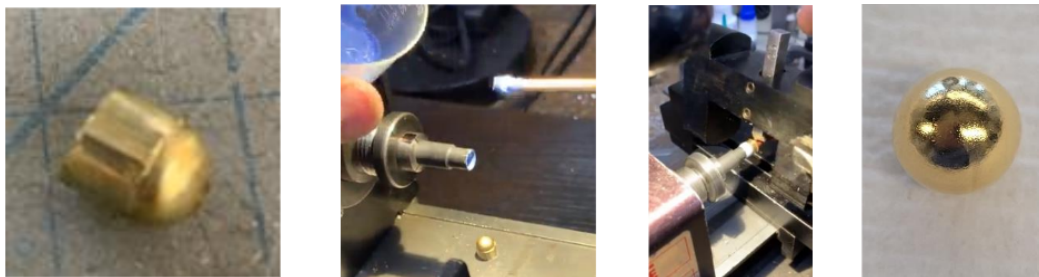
Machining of Sphere Showing the Press Fit Blank, Blank Adhesion Tool, Lathe Machining and the Final Sample
